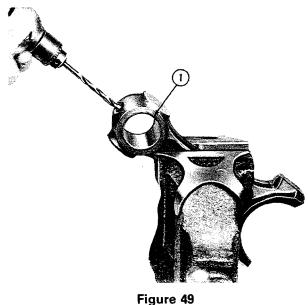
Drilling Connecting Rod Bushing – TW10 1. Connecting Rod Bushing
